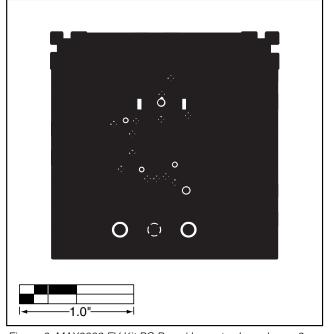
MAX9993 EV Kit PC Board Layout— Inner Layer 2 (GND)
